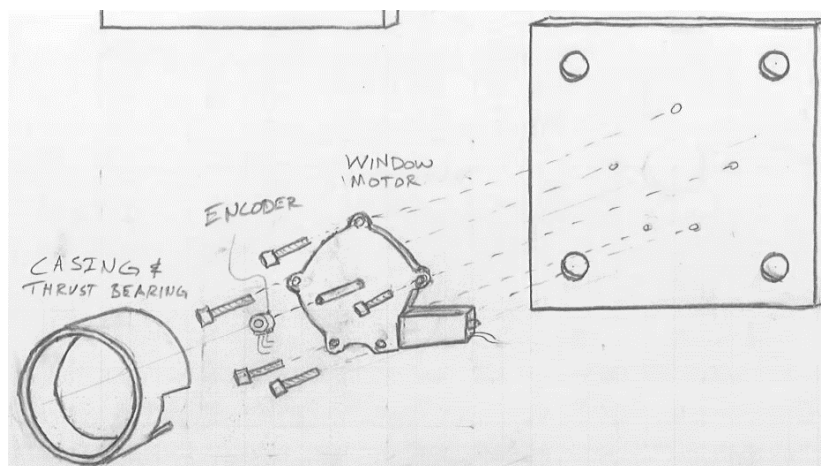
| Lazy Susan Partially Exploded Assembly
